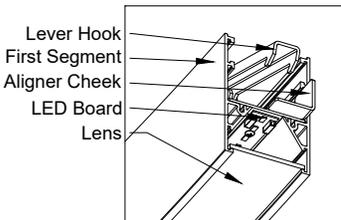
Joiner Details (fixtures with $\varnothing > 12'$)
